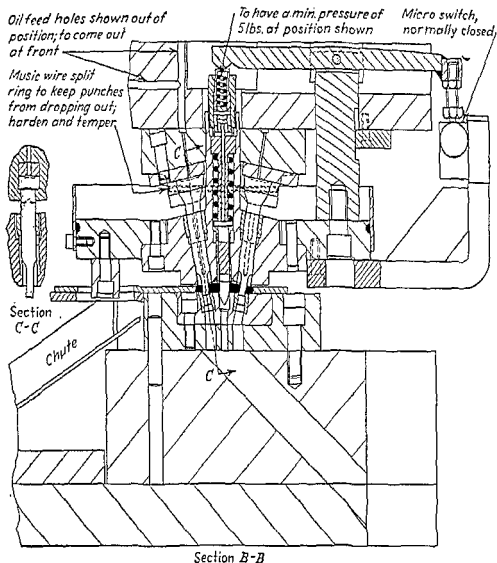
A. Section B-B of die shown in Fig. 5-51.
